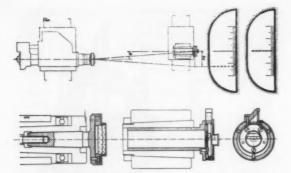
Optical alignment device to align supporting bearing with horizontal spindle axis on three co-ordinate machine.
